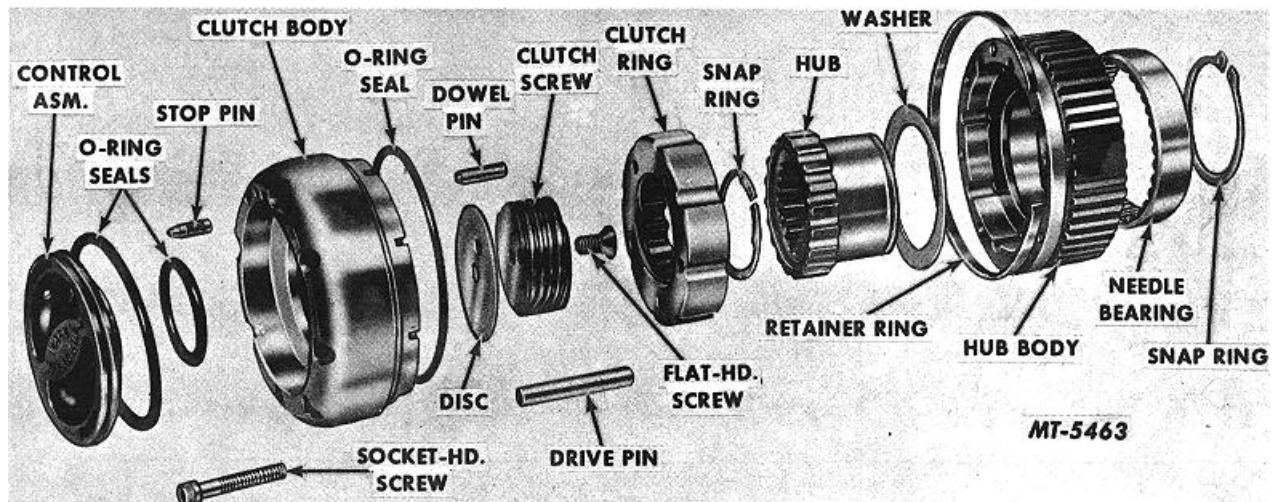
Manual Type Locking Hub with Socket Head Mounting Screw (Exploded View)
